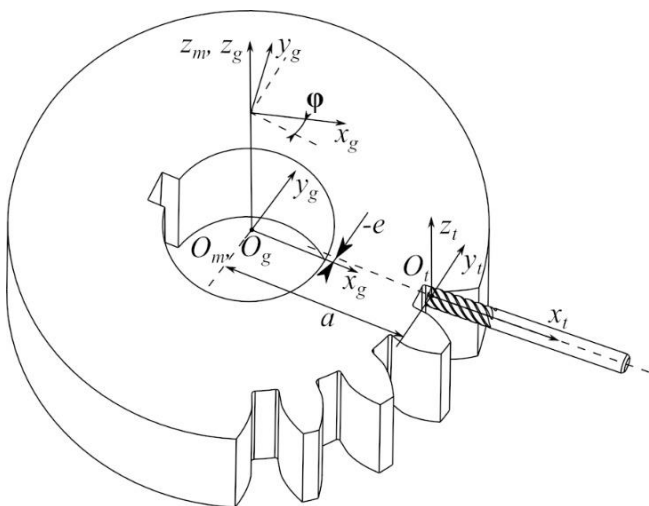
The machining system adopted in the five-axis milling of the cylindrical gear with straight tooth line
